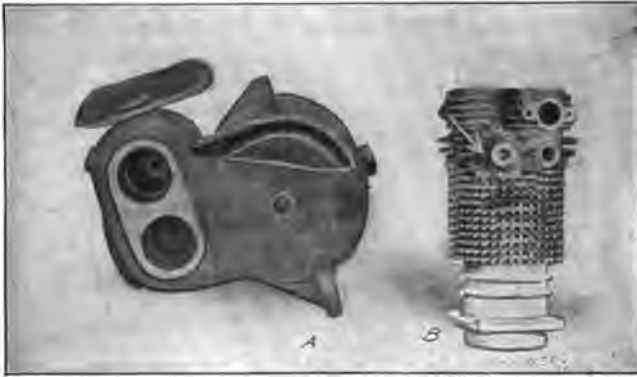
Cylinder Cracked in Inner Wall, showing Large Section of Outer Wall removed to weld the Crack
